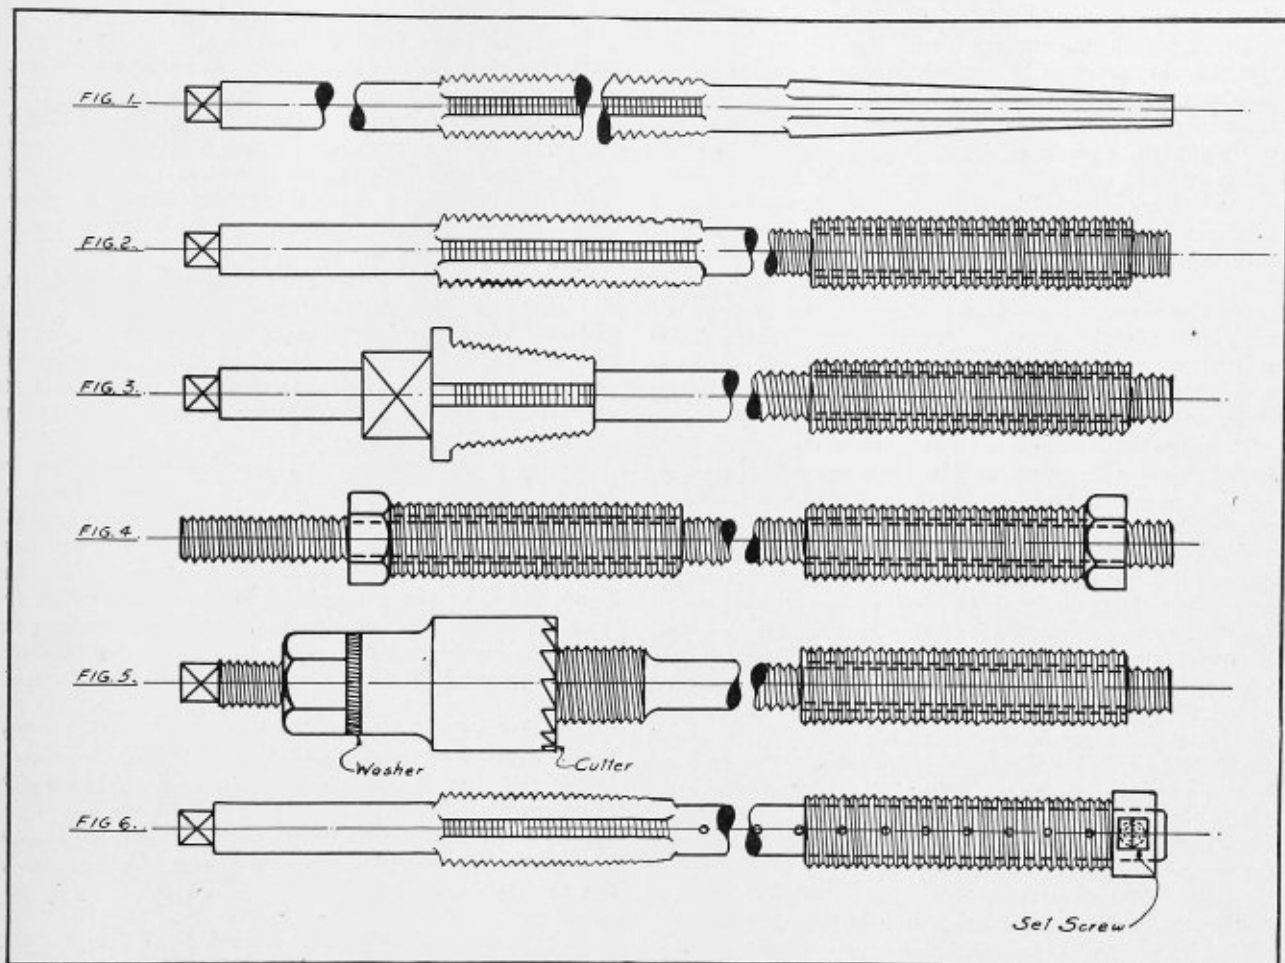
Types of Radial Stays, Taps and Facing Tools Used in Boiler Construction
